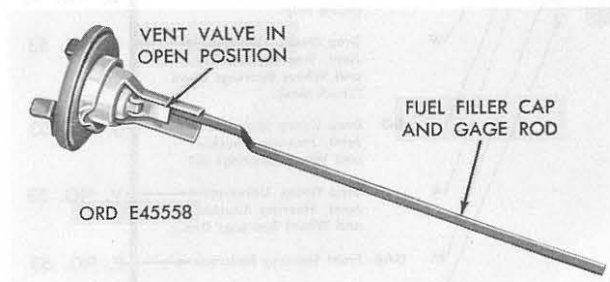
Location of fuel filler cap and gage rod vent valve—M274A1 vehicle.
